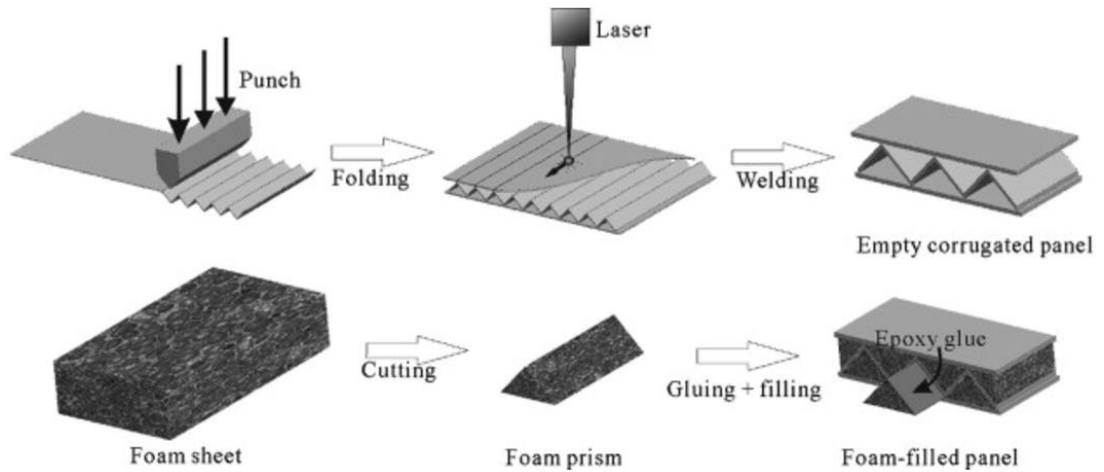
Fabrication process of corrugated sandwich beams with unfilled and aluminium foam-filled cores [25].
